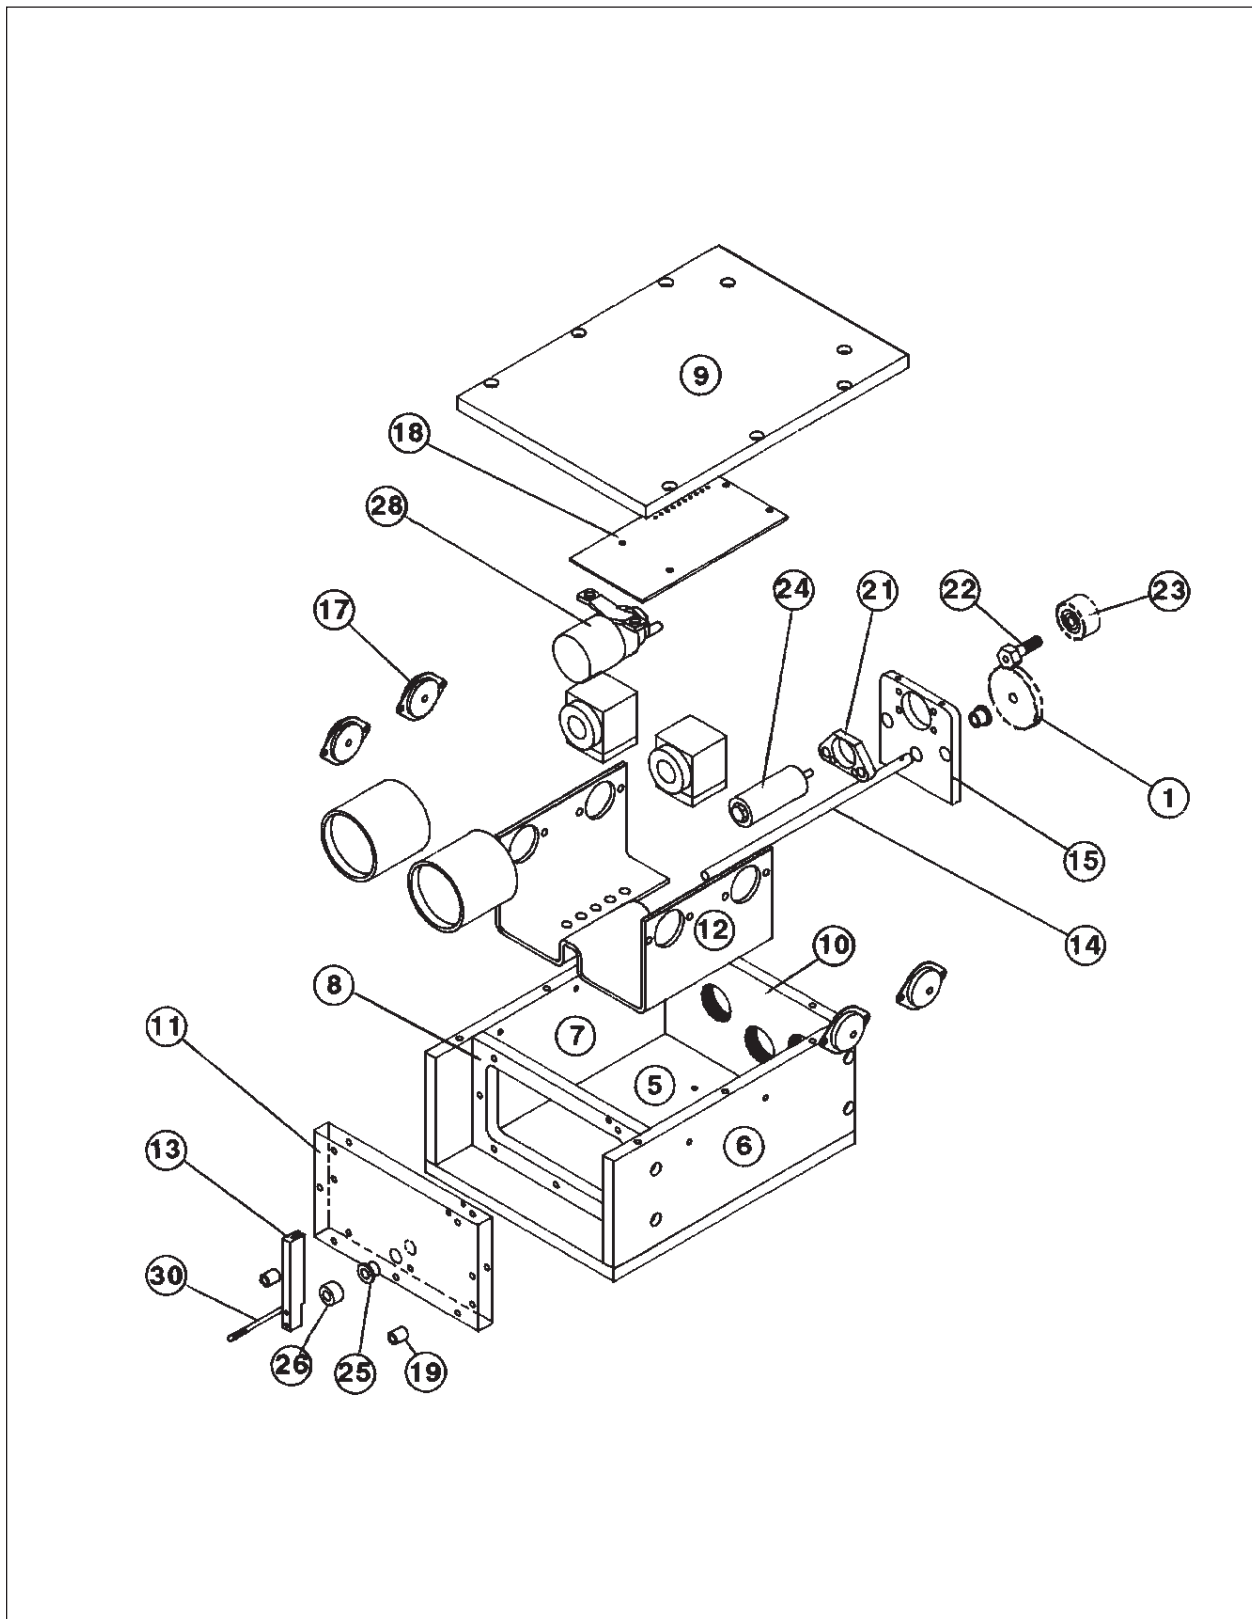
HS5000/HS5001 Exploded Assembly Drawing
